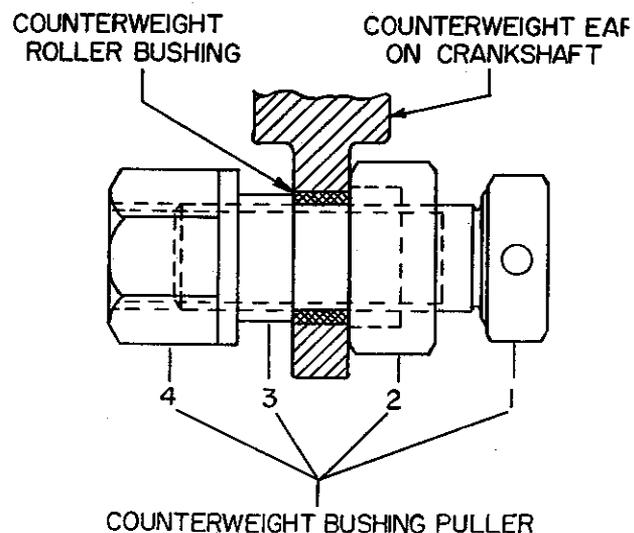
Removal of Crankshaft Counterweight Bushing
